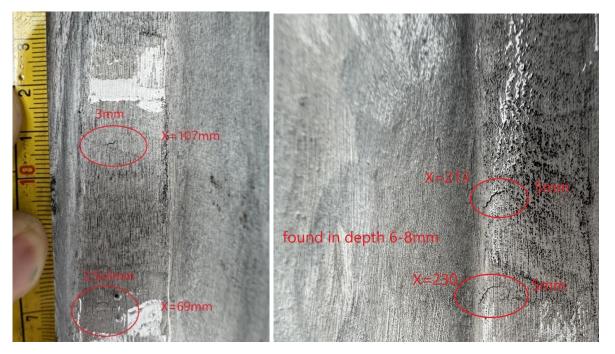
Images of HACC inspected by magnetic particle testing. The weld material is ground to the depth where indications were detected by UT. The images provide good insight into the shape and size of the cracks.
